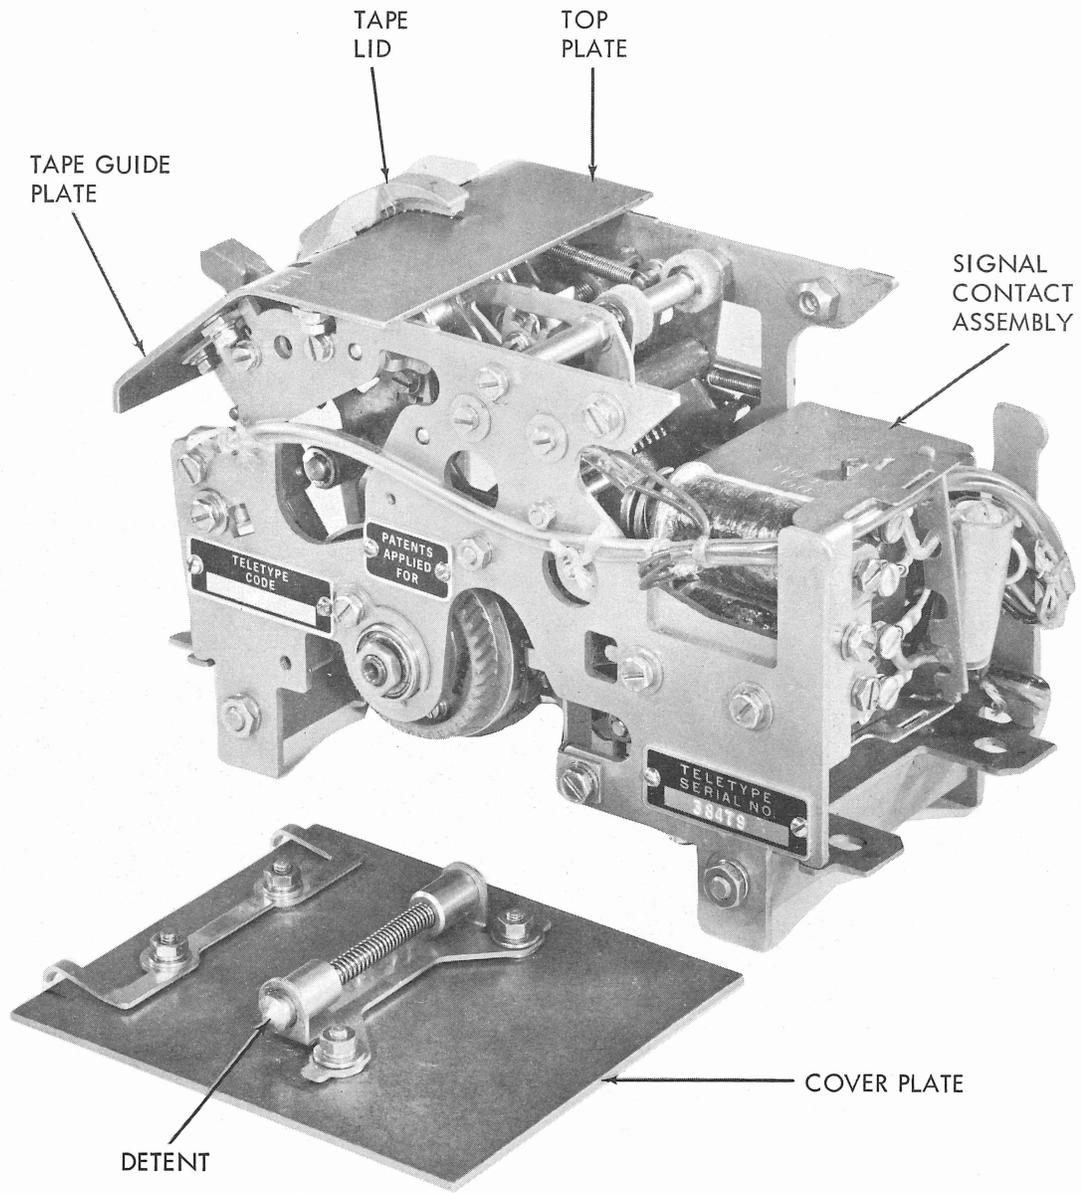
35 Transmitter Distributor Cover Plate Removed
